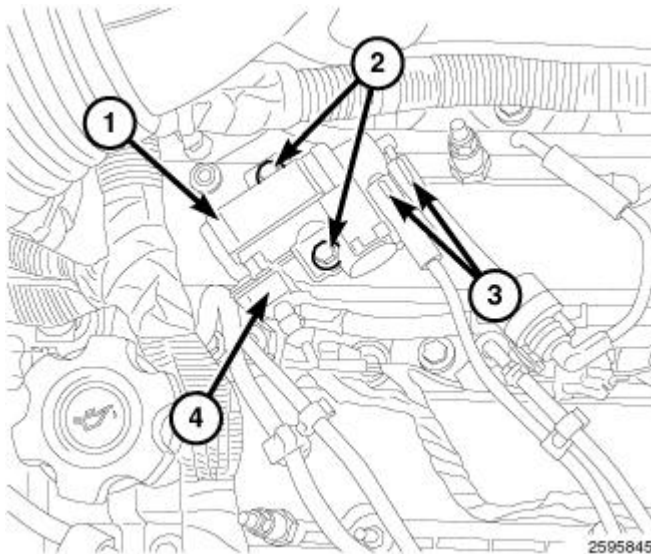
EGR Vacuum Solenoid, Bolts, Vacuum Lines & Harness Connector
